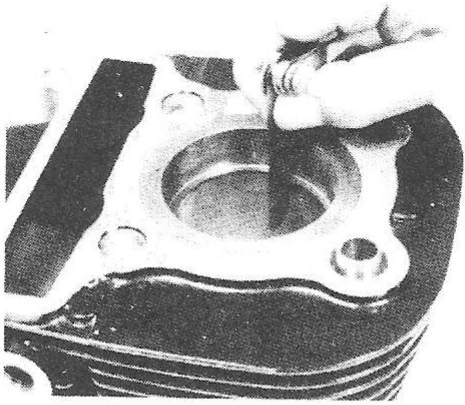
B.22 Checking the piston ring end gap with a feeler gauge (Sec 12)
